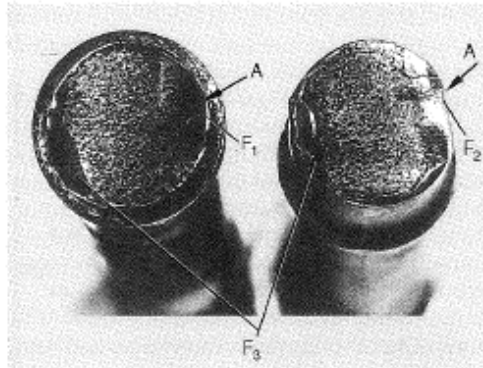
Fracture surfaces of a bolt shaft, with crack initiation site at A, primary fretting fatigue fracture surface F_1 , secondary fatigue fracture surface F_2 , and residual fracture surface F_3 .
